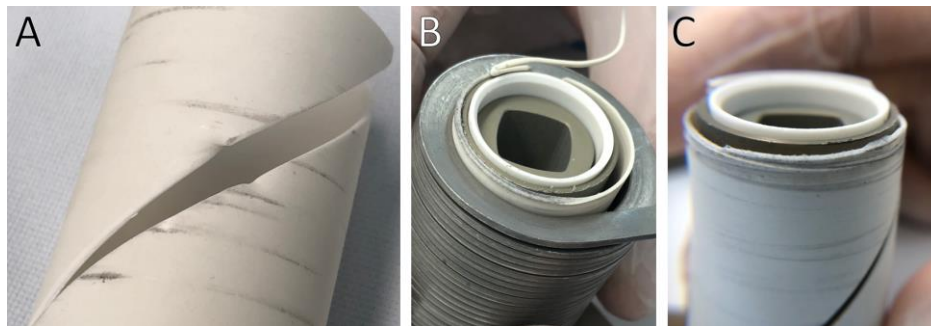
A) Sleeve bearing showing wear and self-contact after disassembly, B) first failed sleeve bearing shown with spring, and C) second failed sleeve bearing with spring removed.
